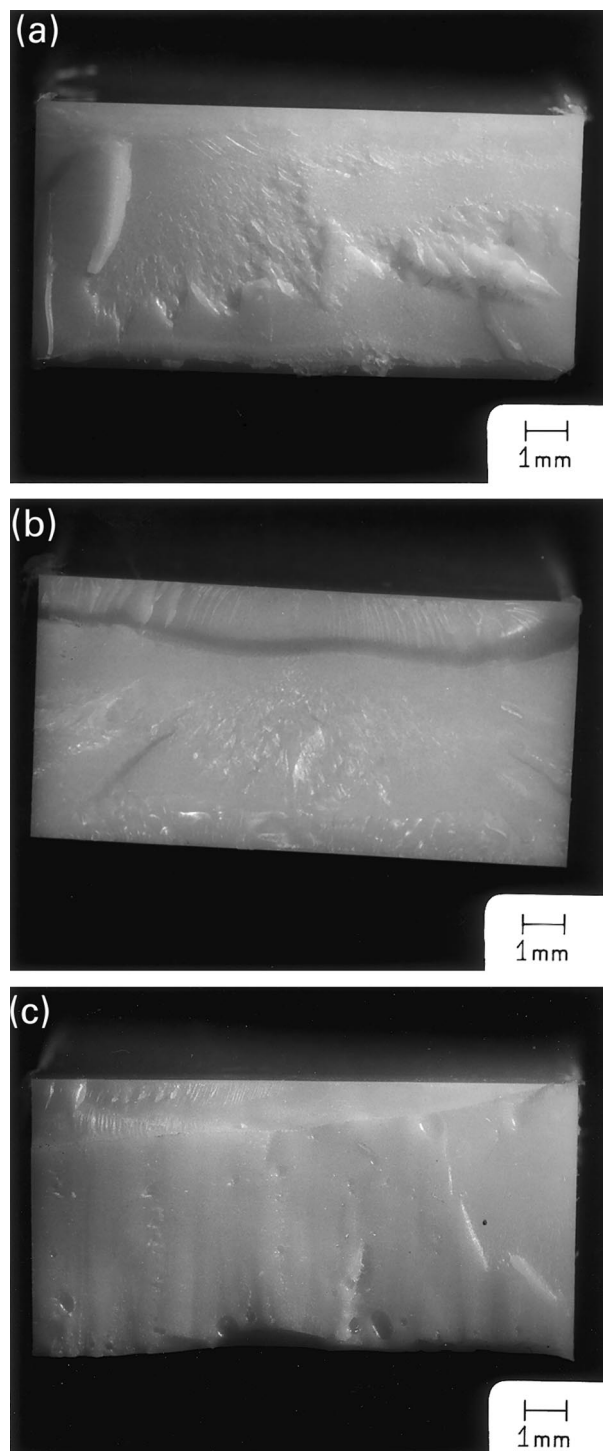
Fracture surfaces of 6.1-mm-thick PBT specimens for hot-tool welds made at (a) $T_H = 260^\circ\text{C}$, (b) $T_H = 335^\circ\text{C}$, and (c) $T_H = 380^\circ\text{C}$. In these welds, the melt penetration was 0.66 mm and the melt time was 15 s.
